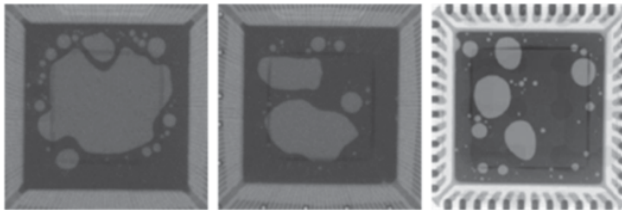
Voids inspection in solder interface with an x-ray equipment
